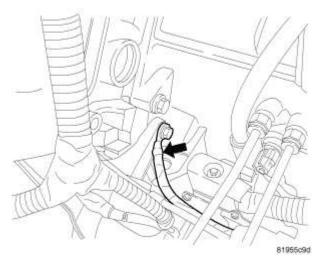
Identifying Ground Cable Courtesy of CHRYSLER LLC
